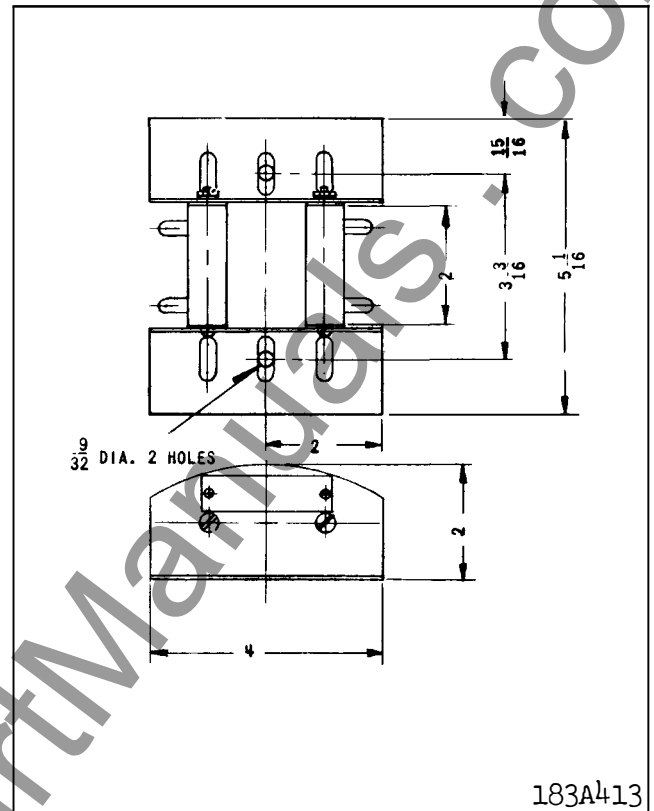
Outline & Drilling Plan for External Remote Trip Resistor Assembly.
